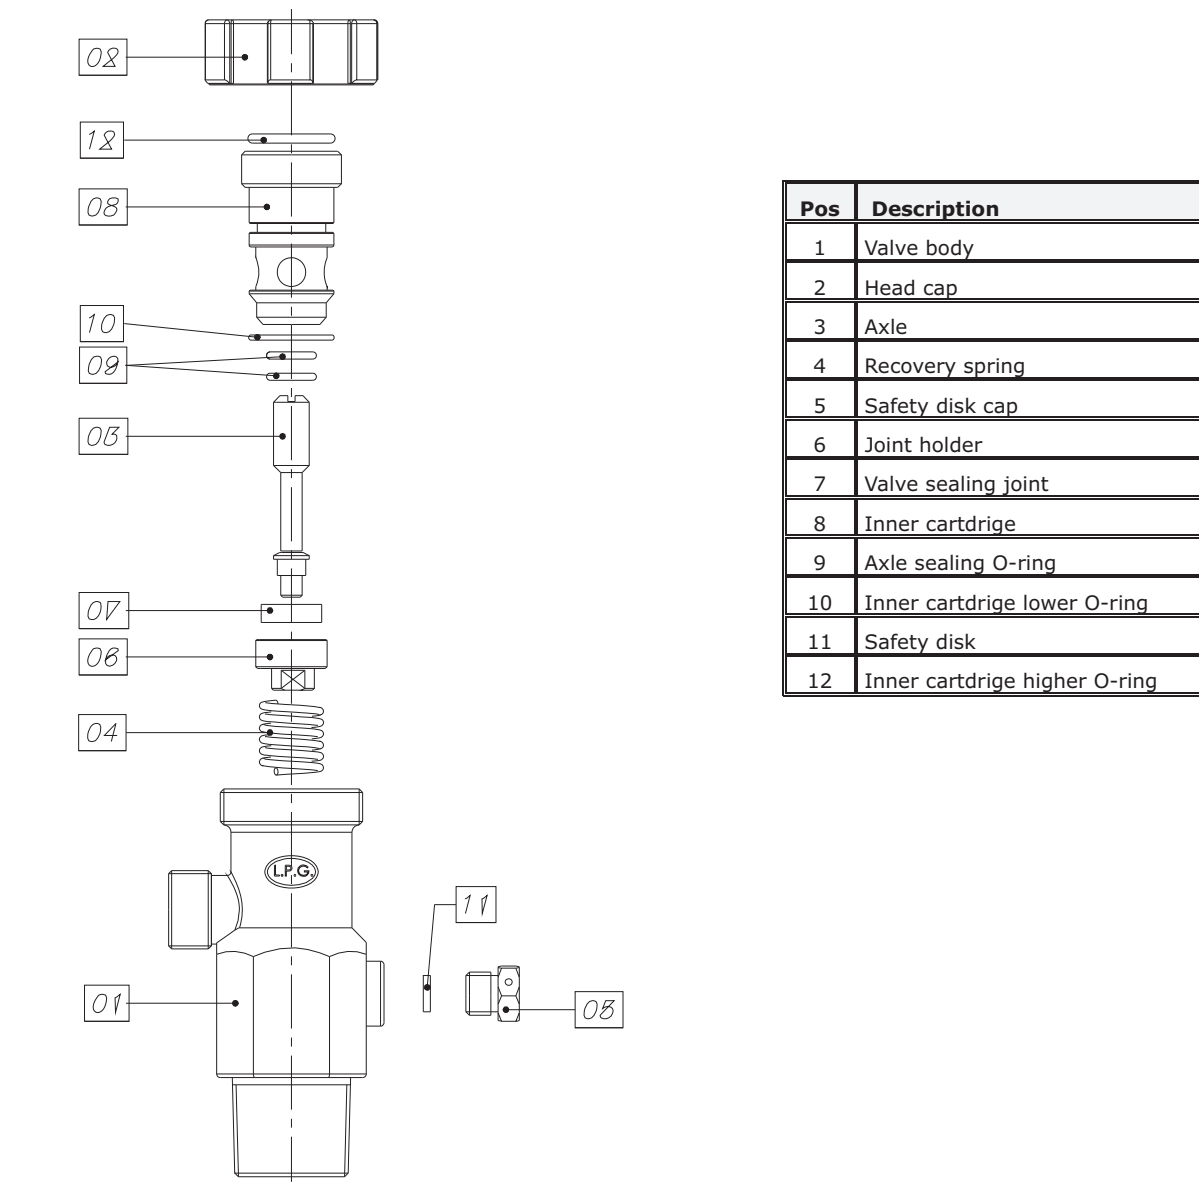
LPG 110-00 "explosion" valve
